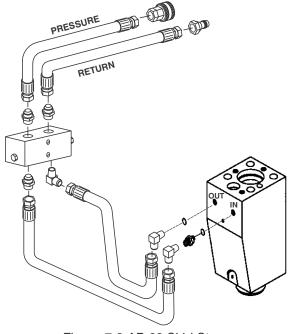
AR 62 Skid Steer. Connecting Hydraulic Lines
